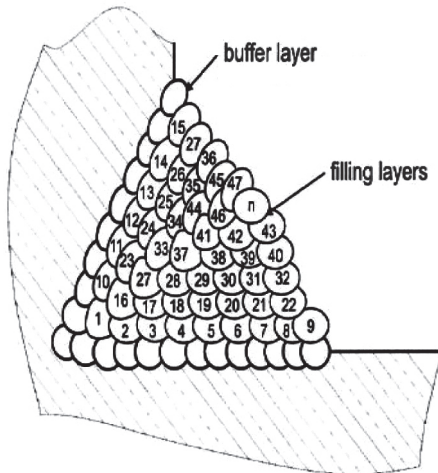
Order of execution of welding work: buffer layer and filler layer [4]
